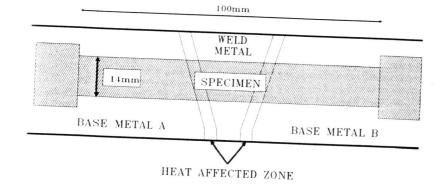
Schematic showing the position of cross-weld specimens removed from the ex-service weldment.
